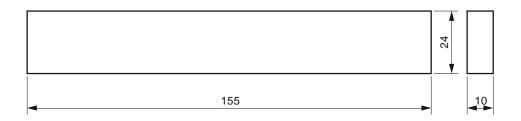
Dimensions of the three point bend test specimen in millimeters (mm)
